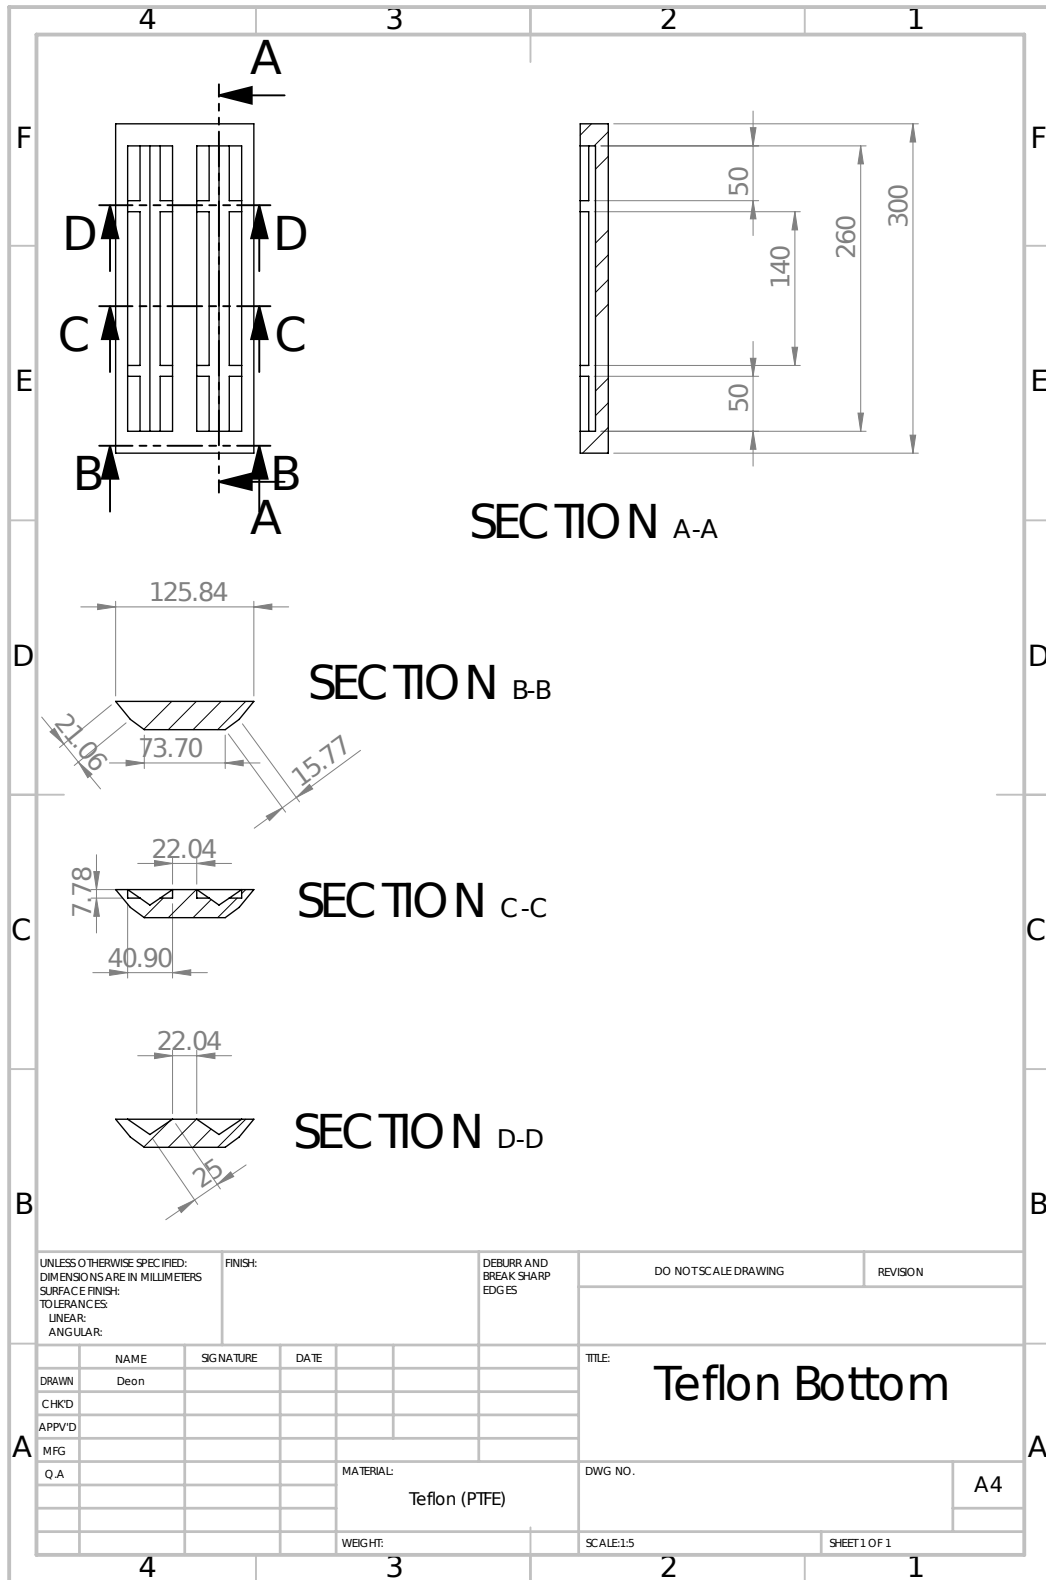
Drawing of PTFE bottom mount for cavities in vacuum chamber
